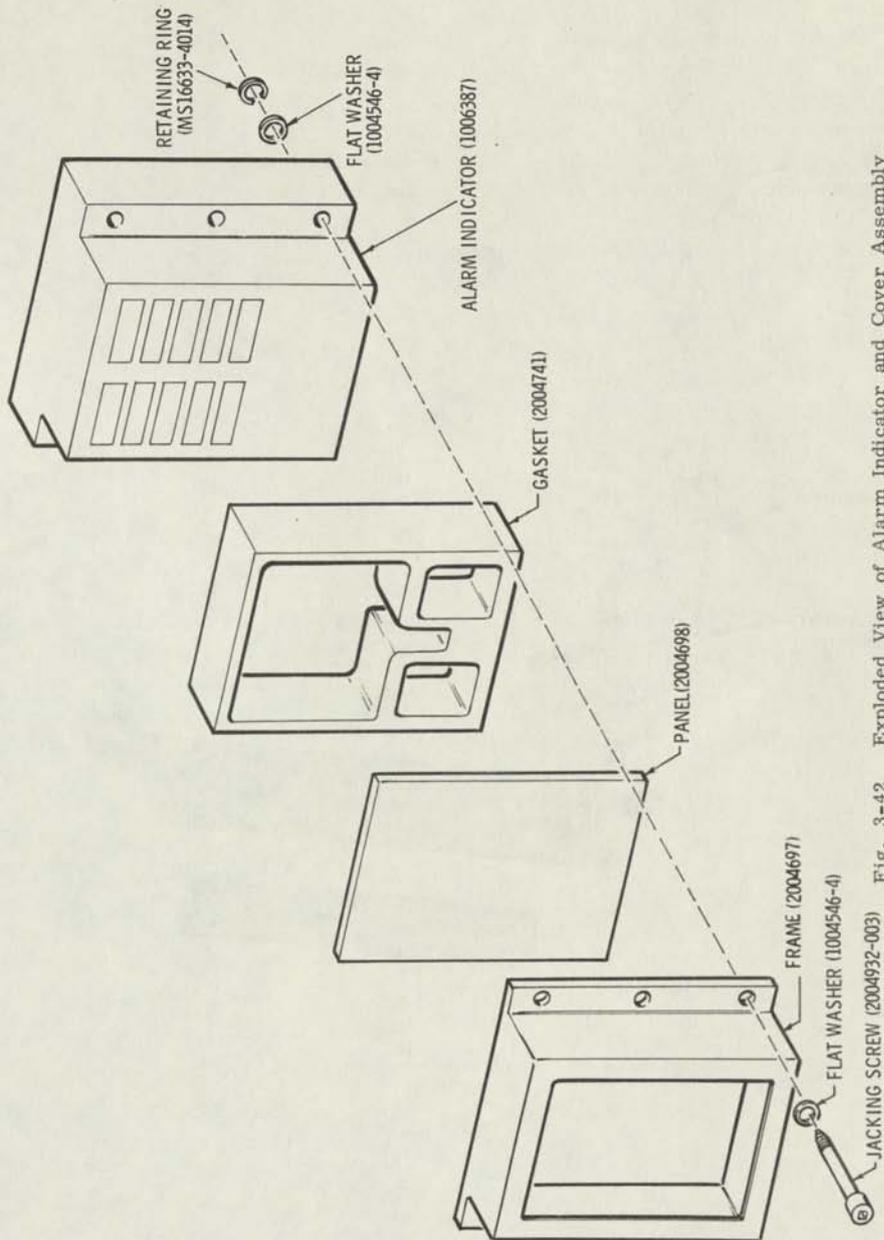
Exploded View of Alarm Indicator and Cover Assembly
